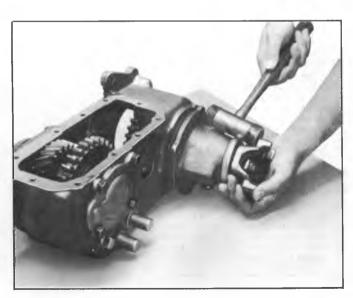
D-Removing Rear Output Shaft Sub-Assembly
